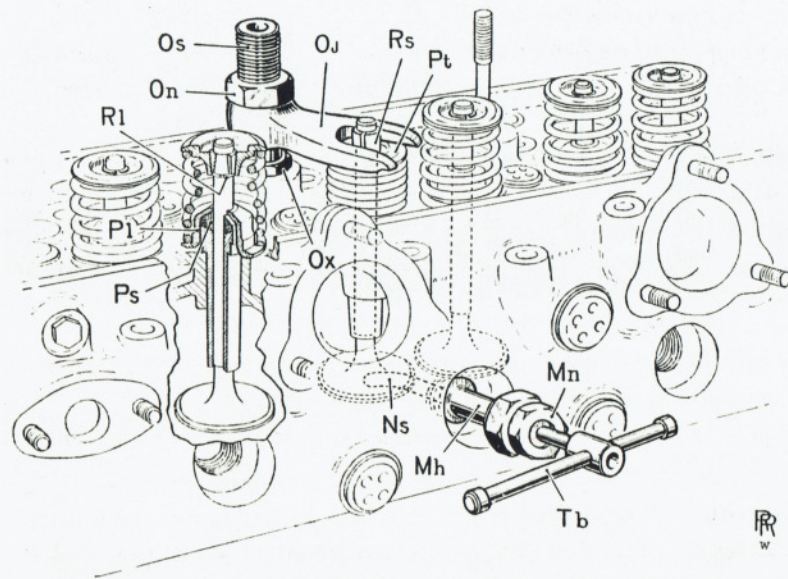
COMPRESSING VALVE SPRING WITH SPECIAL TOOL.
